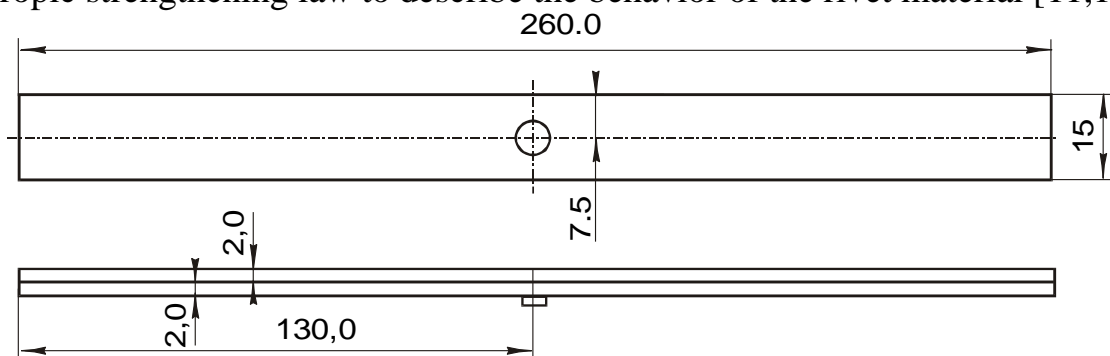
Test-piece with the filled rivet unloaded hole
